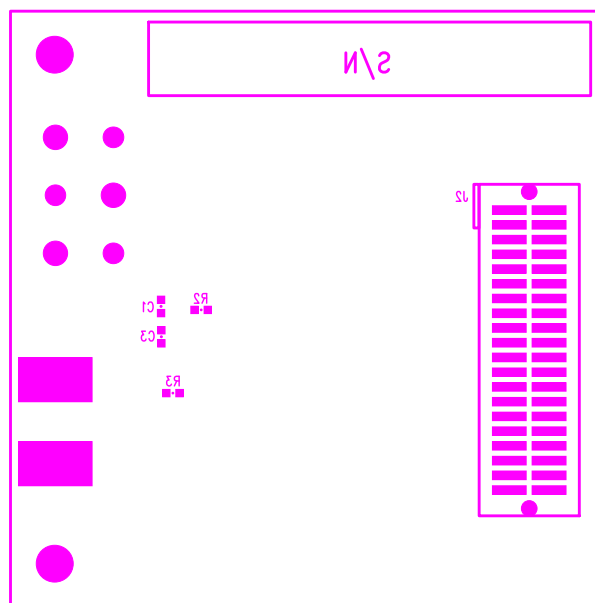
Si4700/01 Daughter Card—Secondary Assembly Silkscreen
